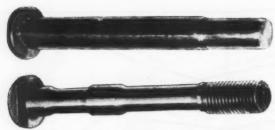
Typical connecting rod bolt obtained by cold forging, shown in the forged and in the finished state. This is a good example of a high quality product obtainable by forging. i.e., optimum grain flow conditions and minimum material wastage. The eccentric head form was obtained by forging and by subsequent trimming.
